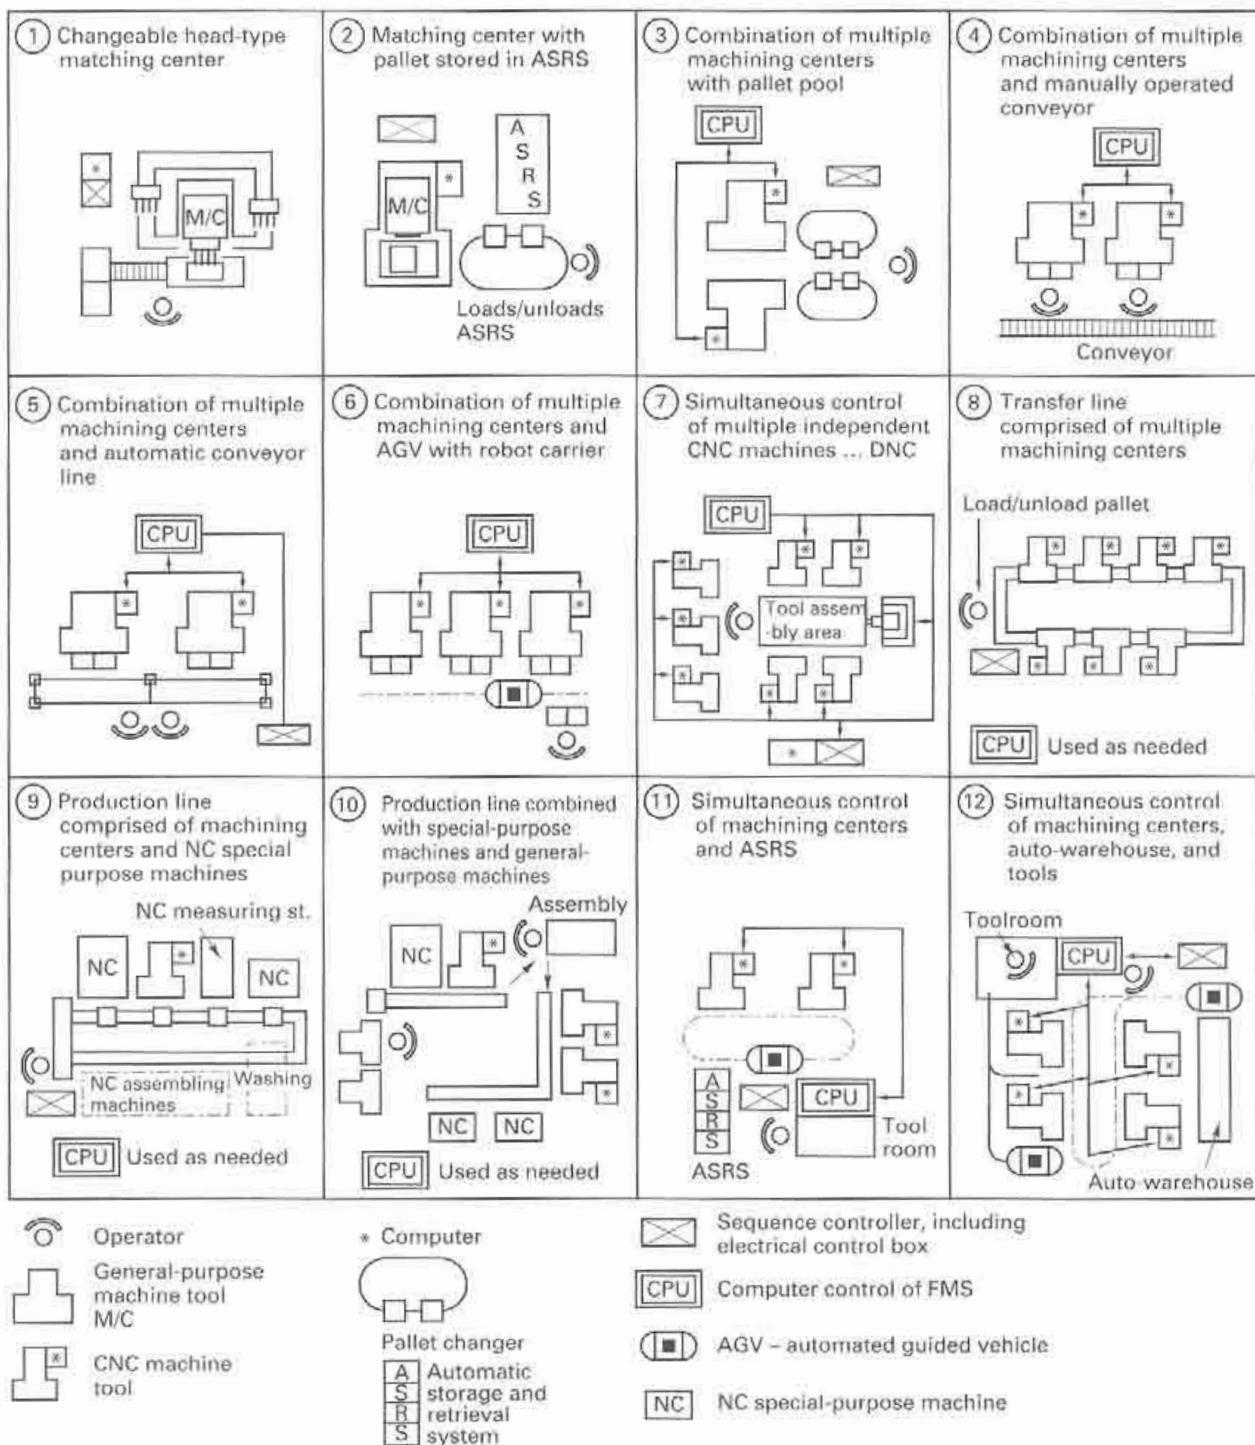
Examples of machining centers—FMC and FMS designs.
